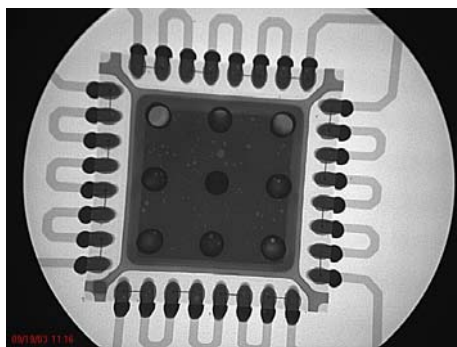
X-Ray Inspection of 5mmx5mm 32-pin QFN
